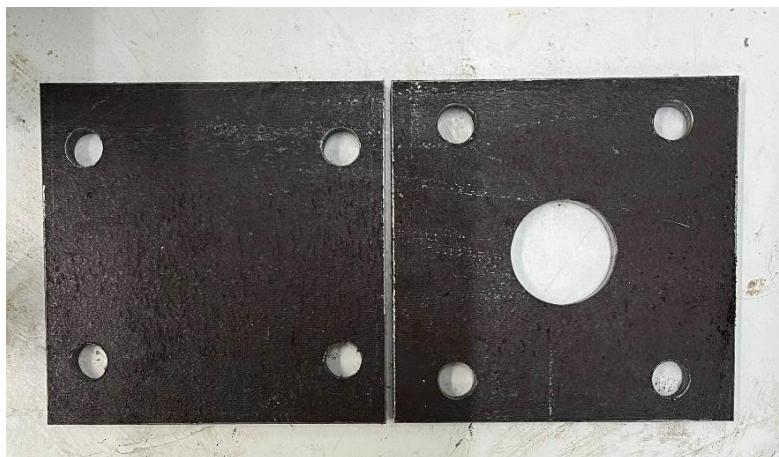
A photo of the 2 different types of plates which were cut by the milling machine.
